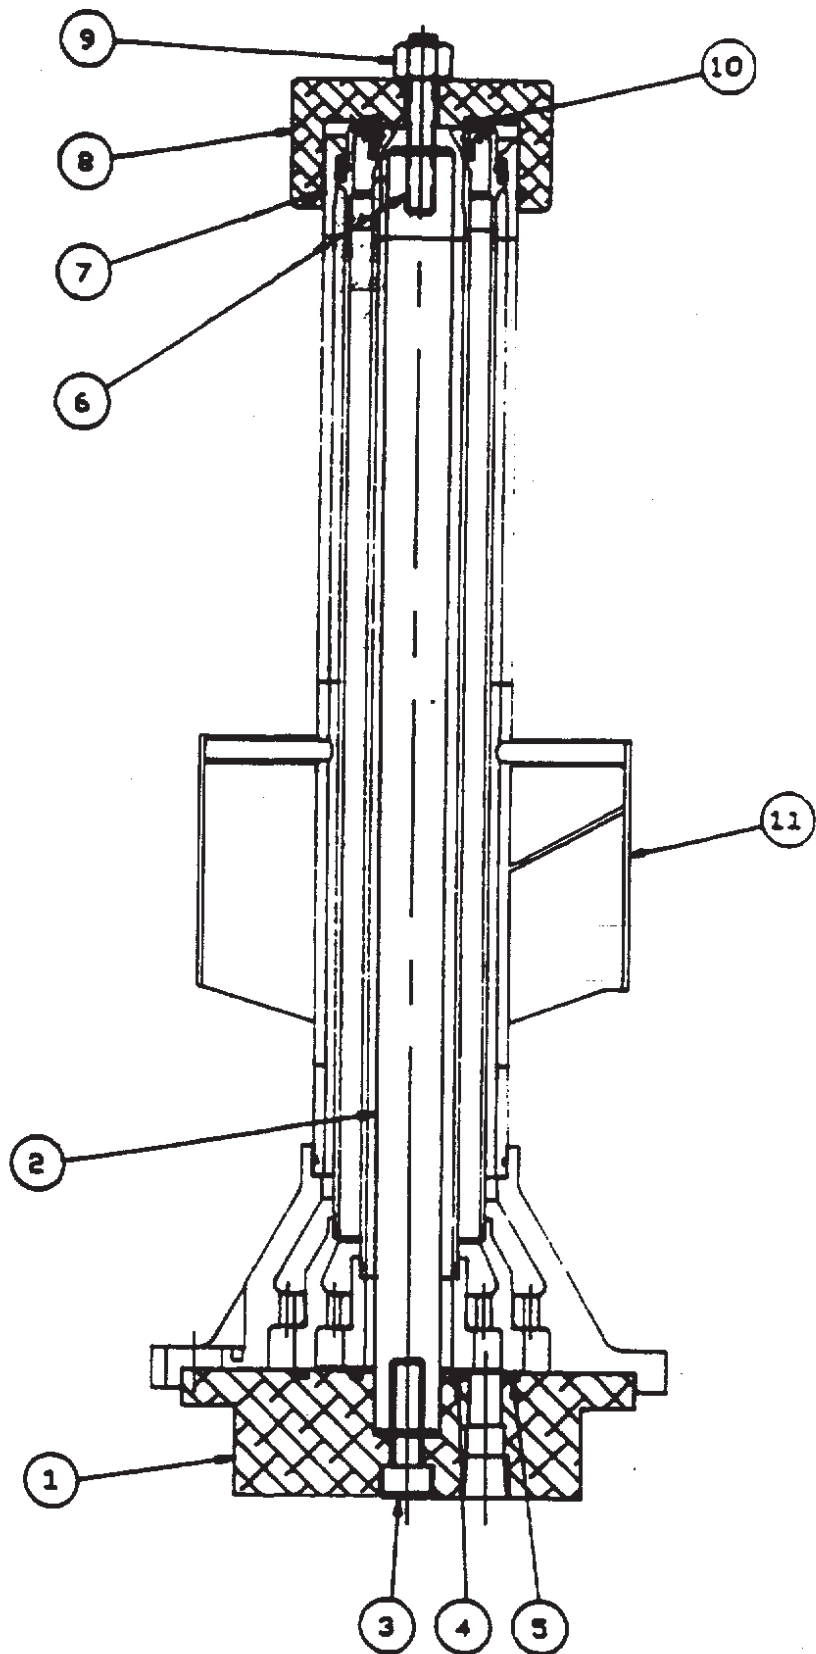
D Injector Tip Seal Pressure Test Using Fixture 514T767
